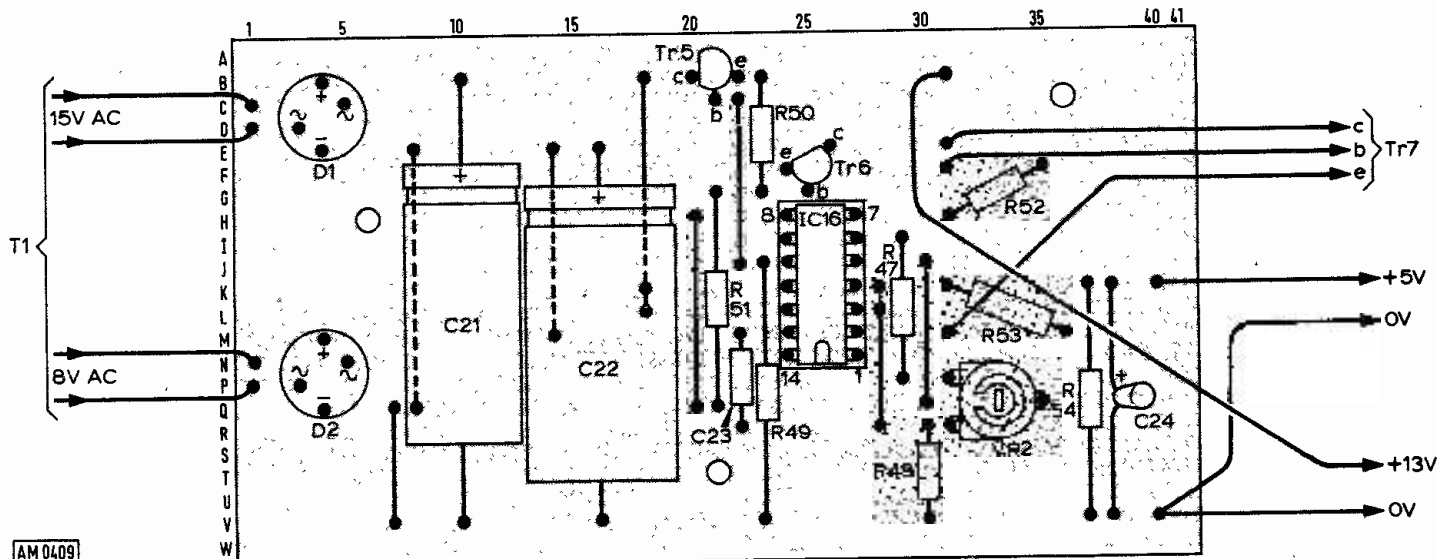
Component layout on the power supply board. Transistor Tr7 is mounted on a heatsink.
